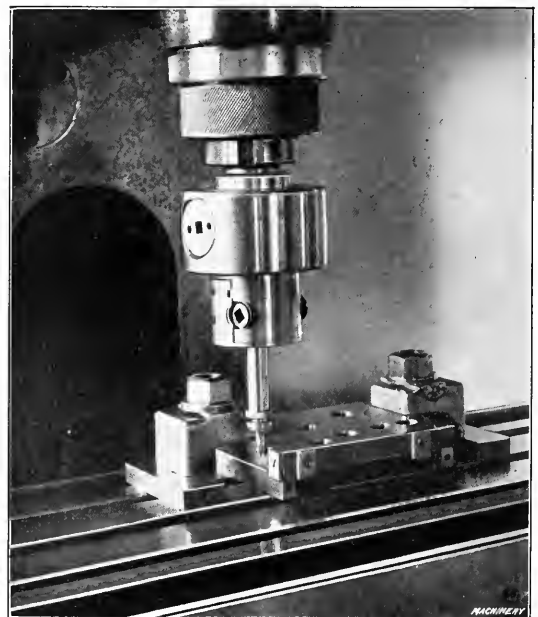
Marvin & Casler Center Indicator in Place on the Machine
